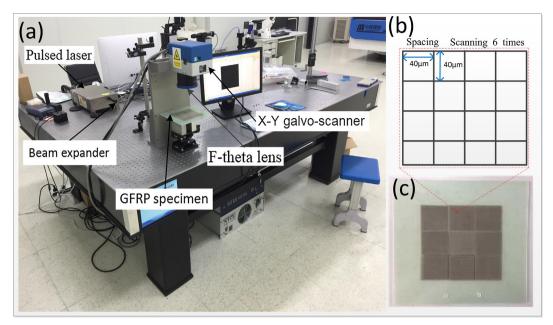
Setup of the laser micro-machining system and the cross grid patterns on GFRP specimen.
